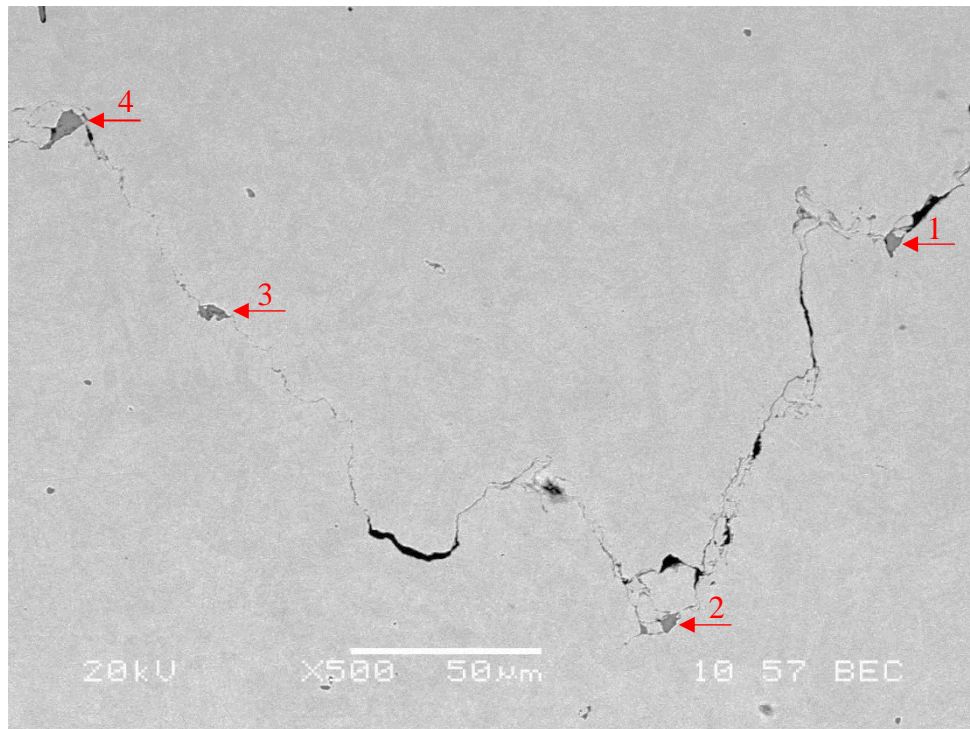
Cross section of the big crack in the high-speed gear tooth
